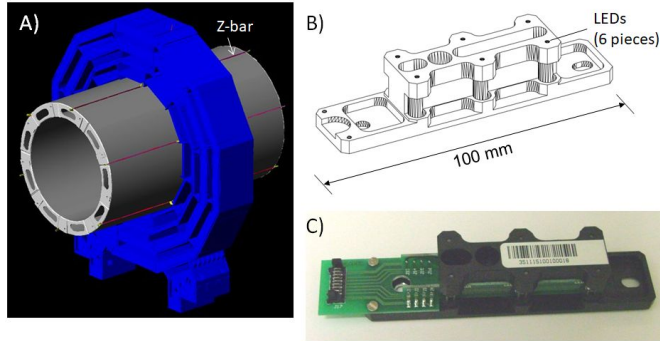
The Z-bars: A) Z-bars on the vactank - conceptual drawing; B) LED holder technical drawing; C) LED holder photo
